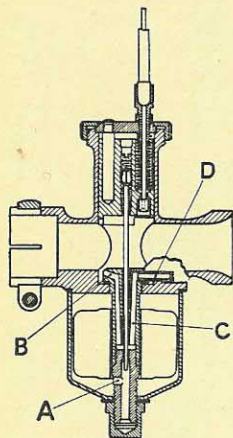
SECTION THROUGH TYPE 3/4 CARBURETTER.
